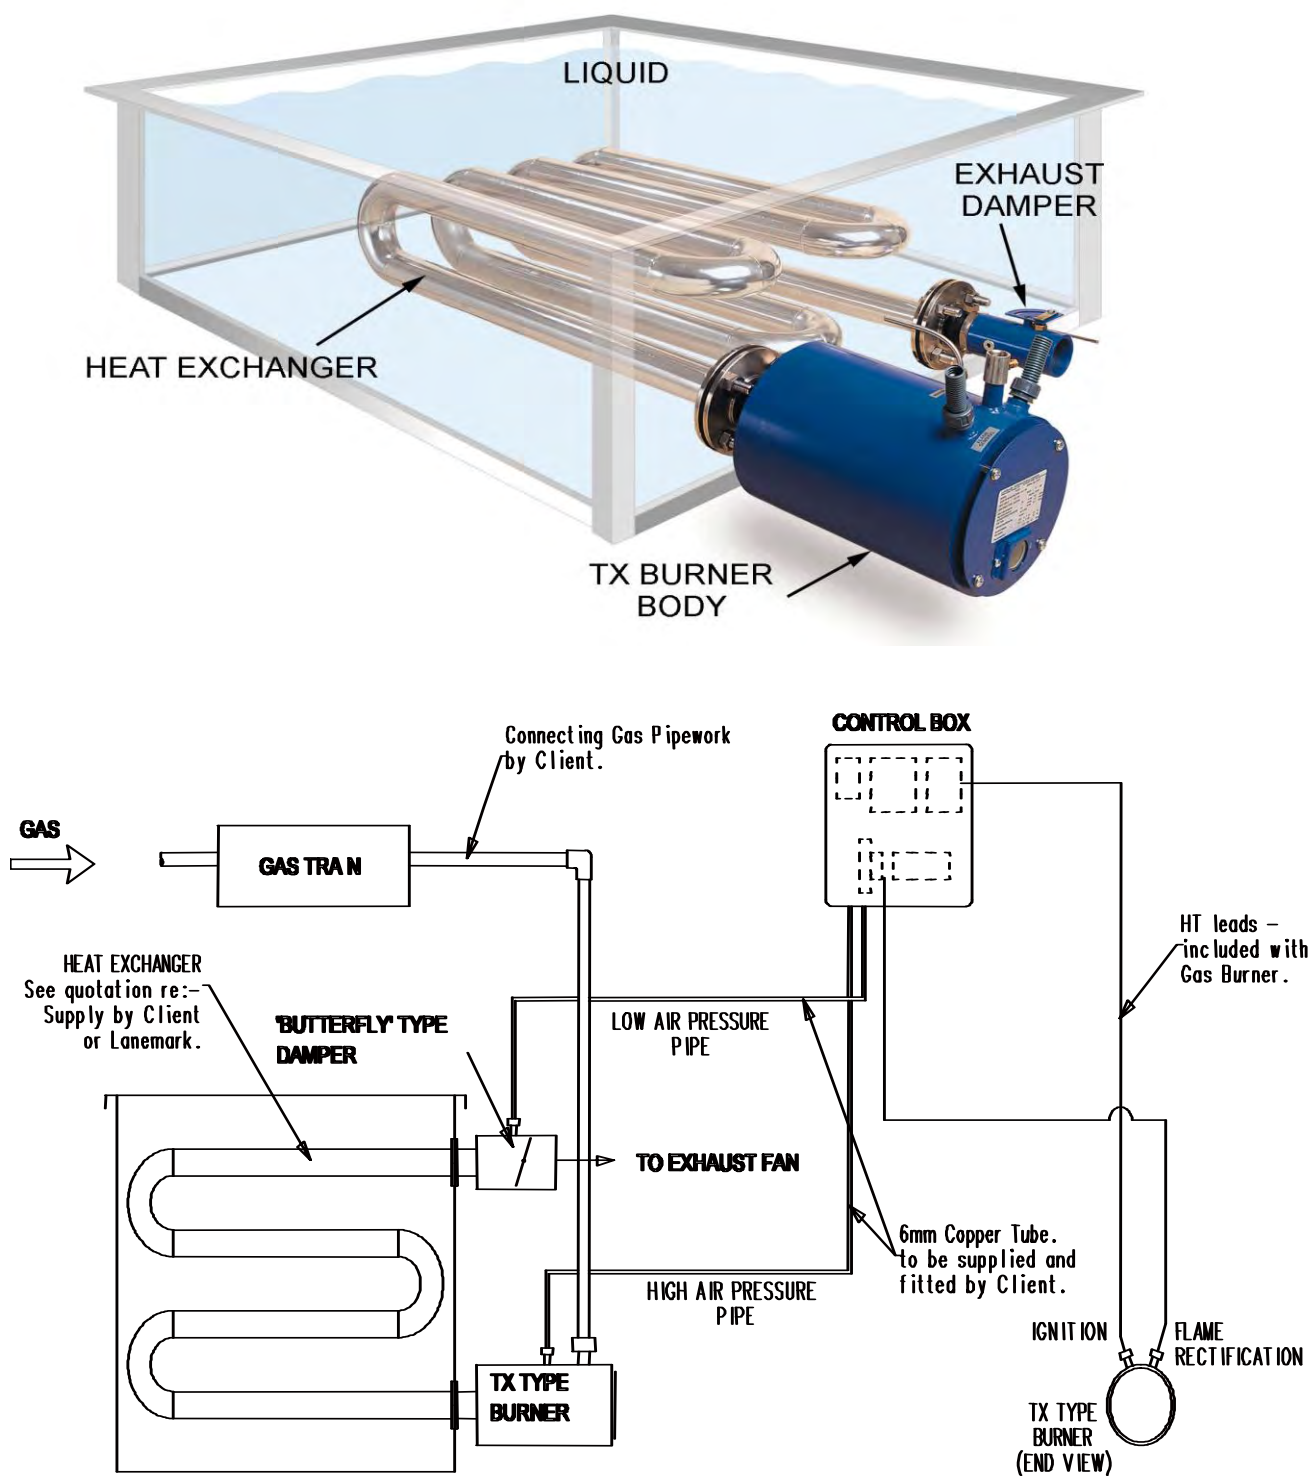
GENERAL ARRANGEMENT OF INSTALLATION
